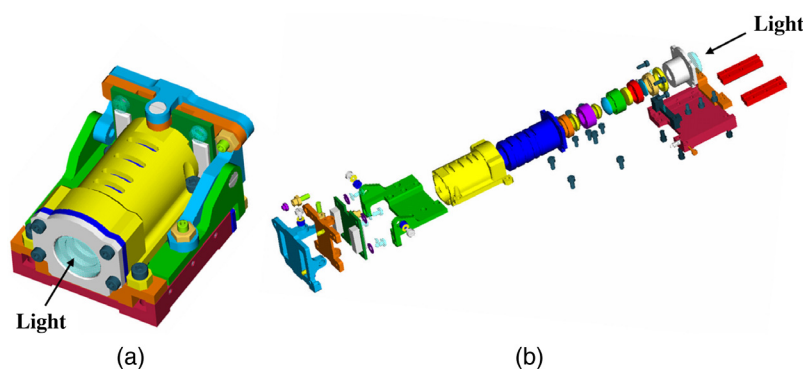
APIS optomechanical design: (a) CAD view and (b) exploded view.
